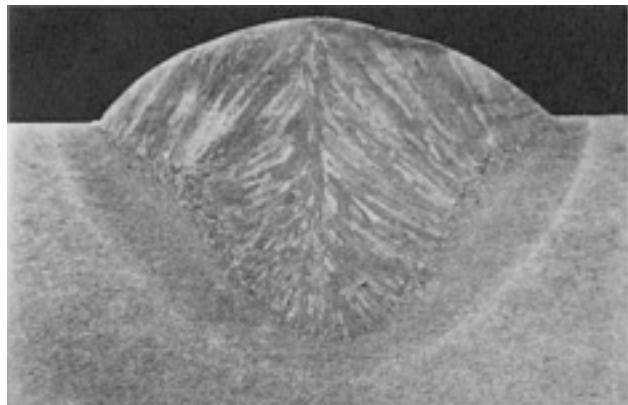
19-mm (0.75-in.) A-710 steel plate, submerged arc weld. Heat input: 3.0 MJ/m. Macrostructure shows the fusion zone, heat-affected zone, and base metal in a single-pass, bead-on-plate weld. 85 mL H₂O + 15 mL HNO₃ + 5 mL methanol. 3.5×
